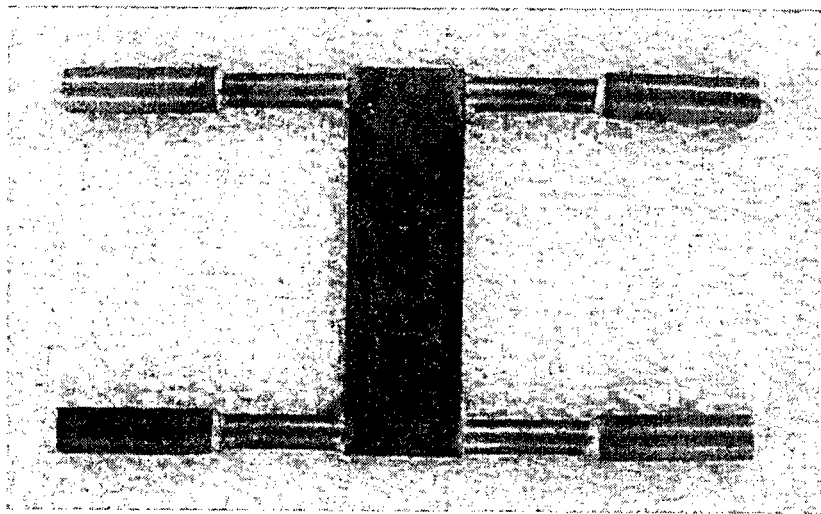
Perpendicular μ Heat Exchange Specimen After Diffusion Bonding, Machining, and Mounting of Inlet and Outlet Tubes
